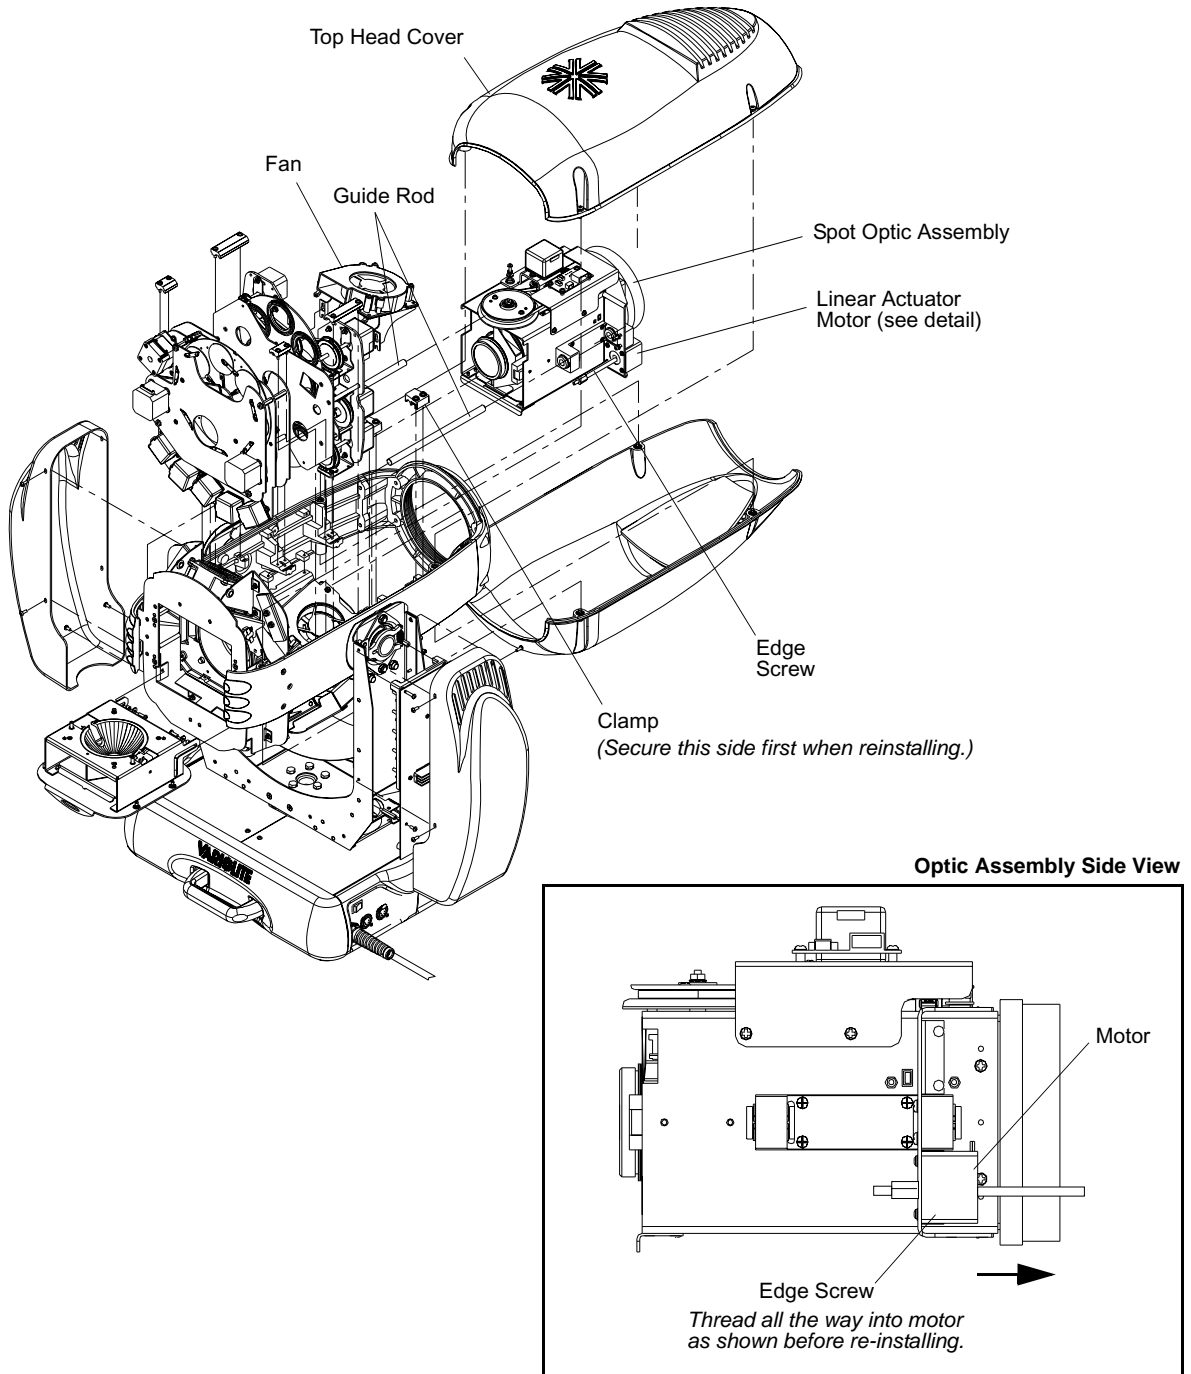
VL3000 Spot Optic Assembly Replacement
